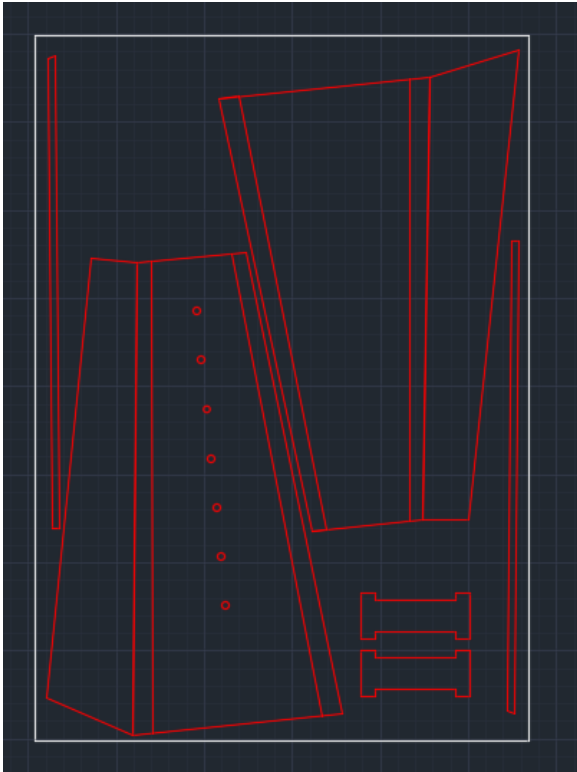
Design of the model using AutoCAD and CNC machine.
